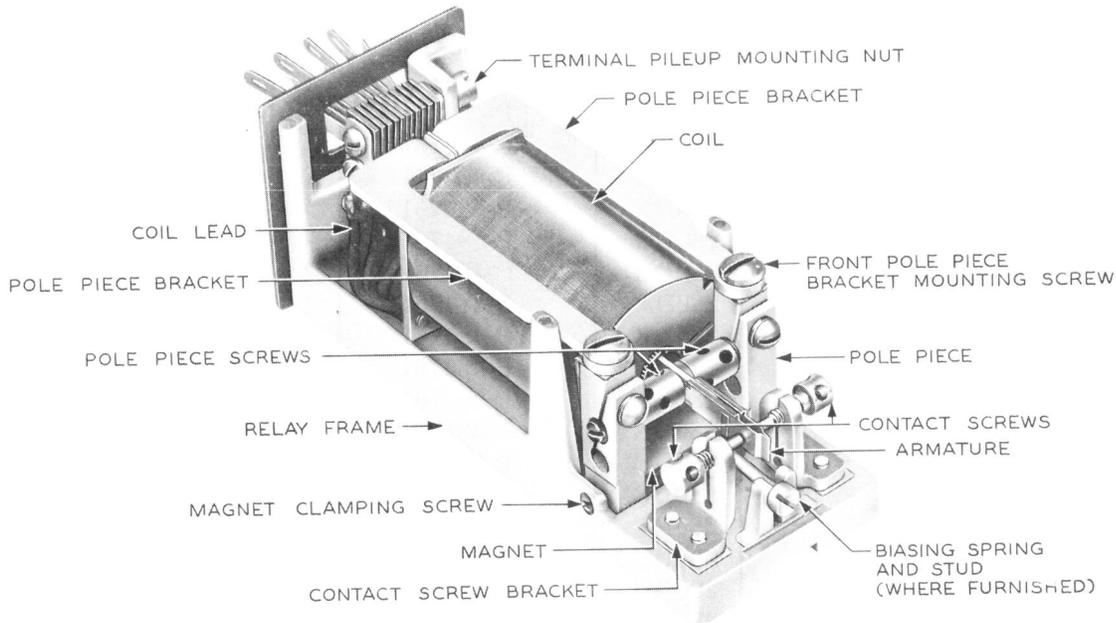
280-Type Relay — General View With Shell and Cover Cap Removed
